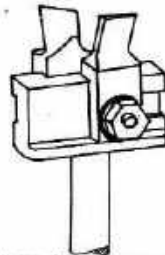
EXPANSIVE DOVETAIL CUTTER
